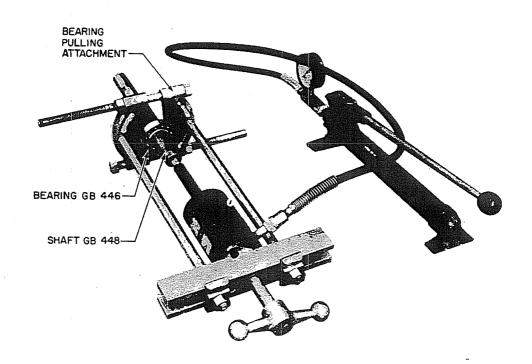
4 to 1 Shaft, Removal of Bearing GB446
